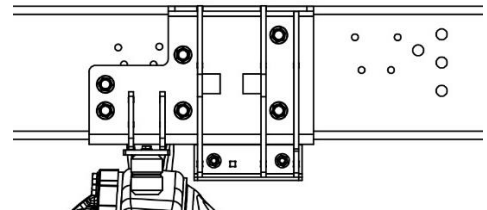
Driver Side (LH) Upper Strut Mount Installation.
